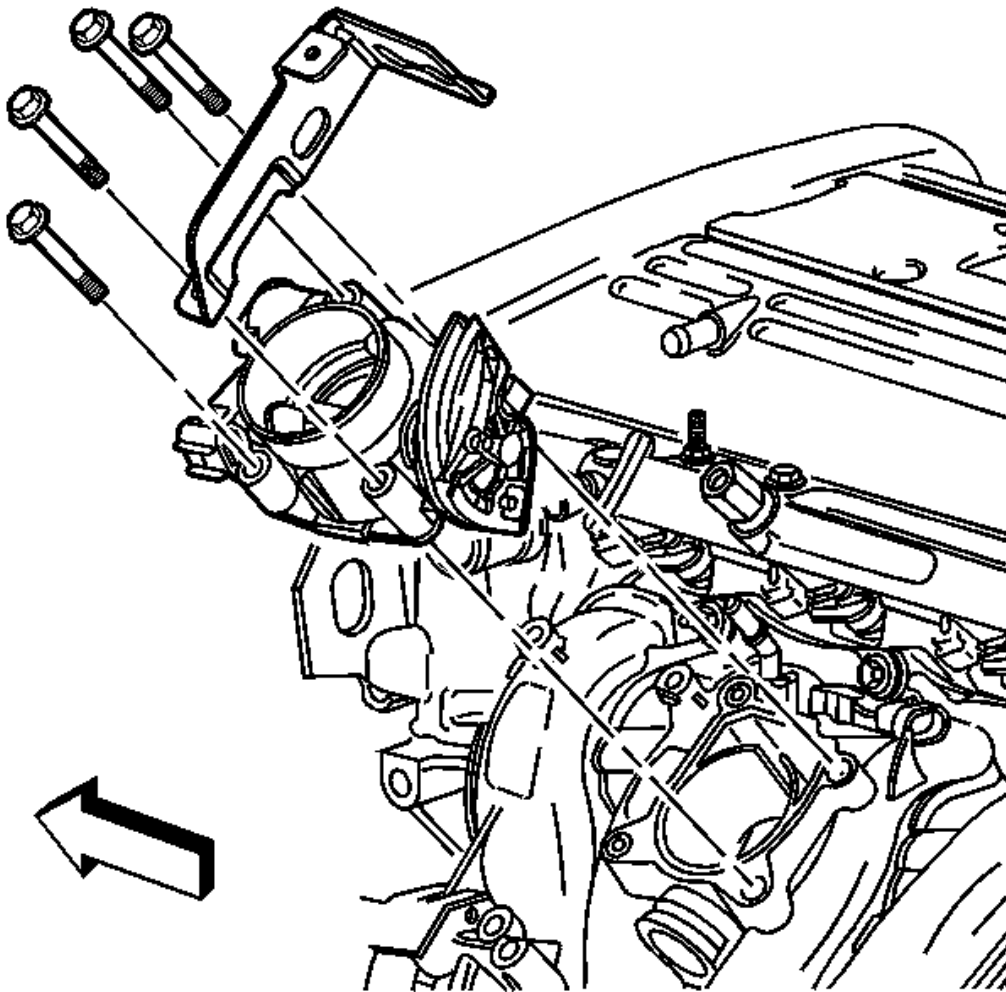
Exploded View Of Throttle Body & Accelerator Control Cable Bracket
